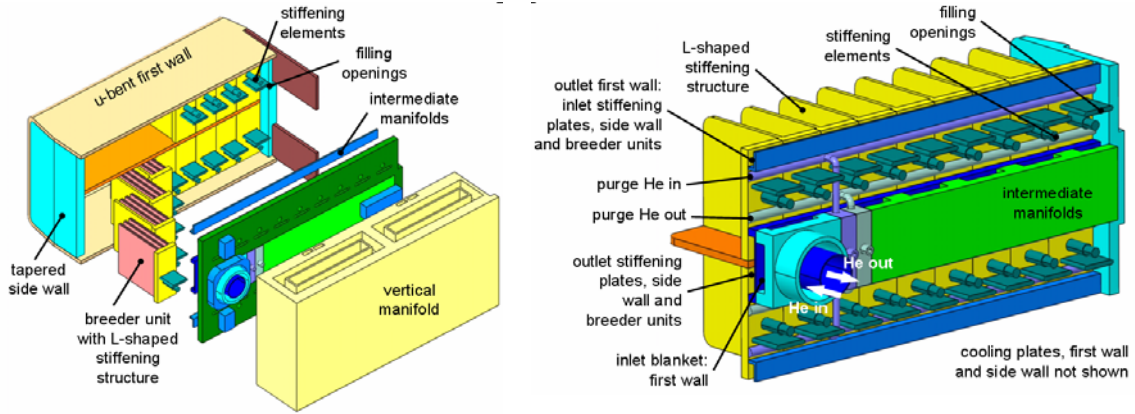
Exploded view of HCPB blanket (left) and assembly drawing with flow scheme (right).
